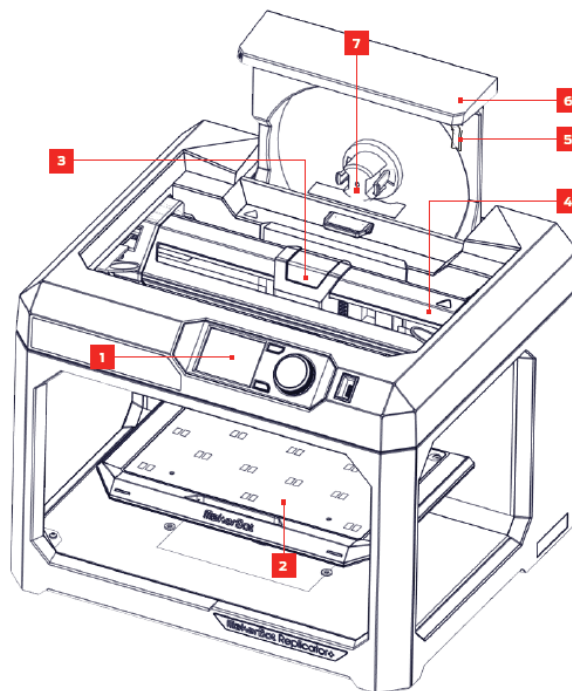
MakerBot Replicator + 3D printer; (1) Control panel, (2) Built plate, (3) Extruder assembly, (4) Gantry, (5) Filament guide tube, (6) Filament drawer, (7) Filament spindle
